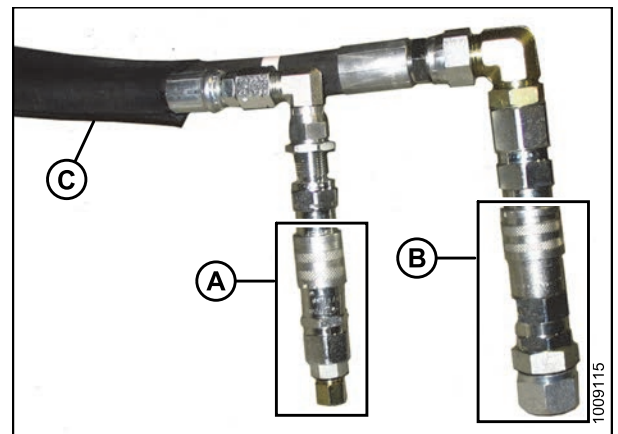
Auger Return and Reel Pressure Hose Bundle
